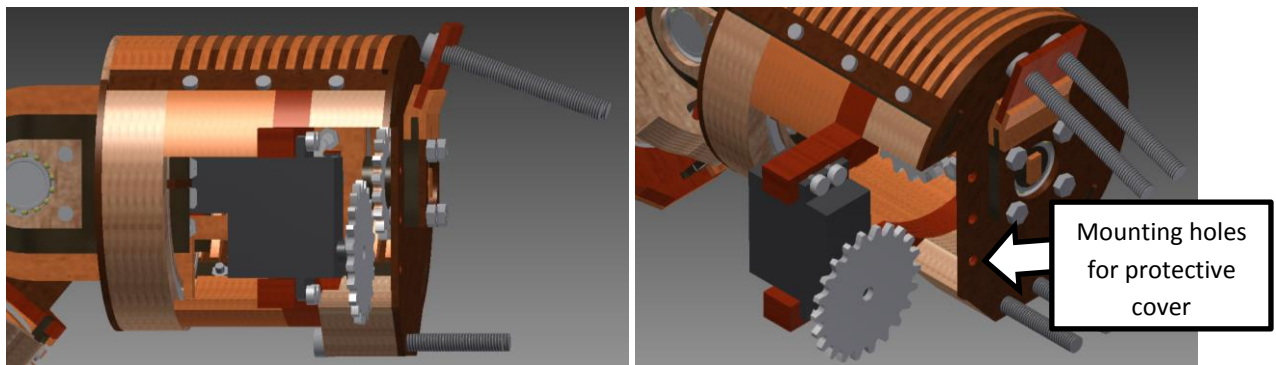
Aligning the sprockets for joint S1 and location of the mounting holes for the protective cover
